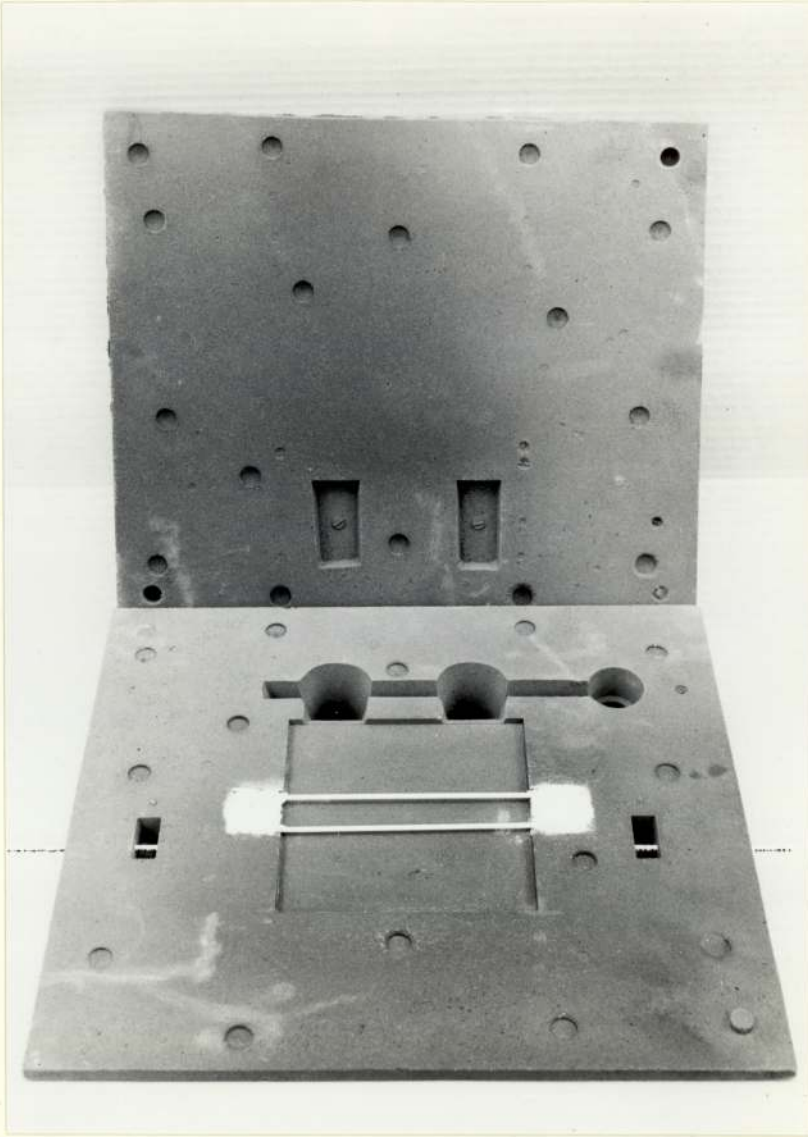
Shell mould for 0.5 cm plate casting, showing thermo couple positioning in the mould cavity and mould wall.
